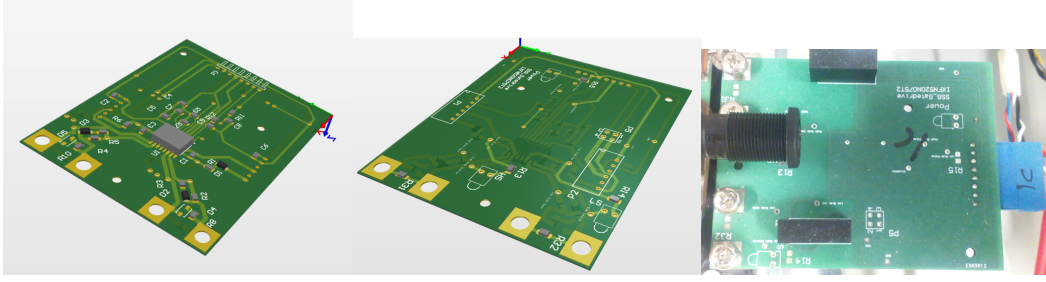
Designed gate drive circuit PCB model (in 3d) and fabricated prototype
